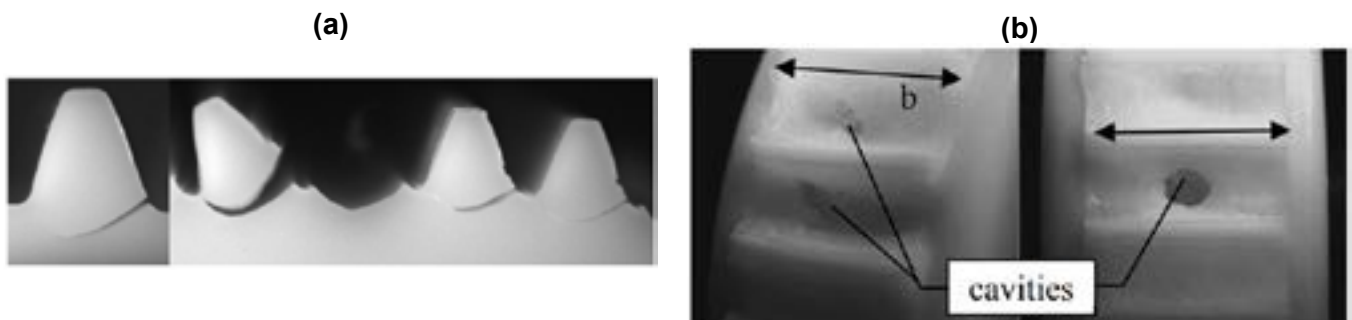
(a) Tooth root breakage failure of polymers gears; (b) Cavities in tooth root breakage area of polymers gears [4].
